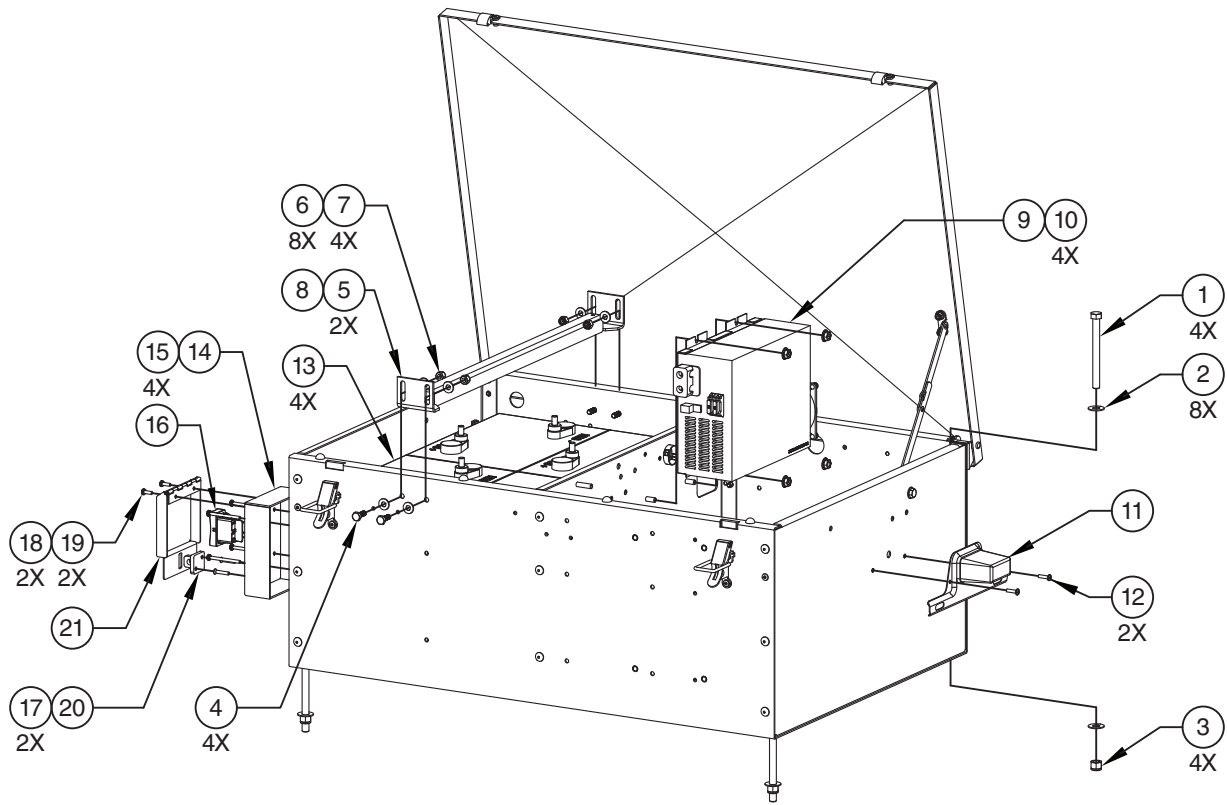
Parts drawing: Display control unit (DCU) for in-cabinet control box
